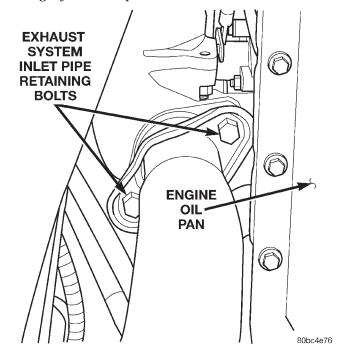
Exhaust System Inlet Pipe Retaining Bolts
